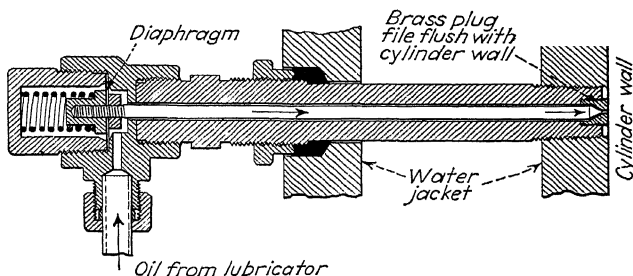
Diaphragm check valve for timed cylinder lubrication. This check valve is used in conjunction with a mechanical-force-feed lubricator for timed lubrication of Diesel, gas, and other engines. The lubricator and piston of the engine are synchronized so that oil is delivered at any predetermined position of the piston. In a four-stroke-cycle engine best results are secured by injecting the oil onto the piston between the first and second rings at the end of the power stroke. For a two-stroke-cycle engine most efficient results are secured by injecting the oil onto the piston at the beginning of the compression stroke, at a point just above the exhaust ports.
